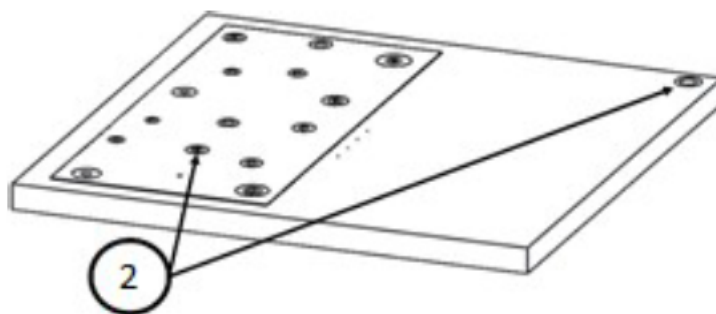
Schematic showing the spot welding of the stainless-steel blade on the sample surface to partially cover the Vickers indentations.
